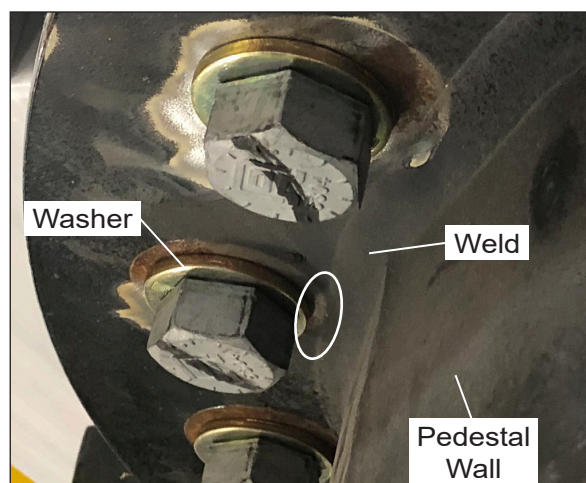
Outer Race Rotation Bearing Cap Screws and Washers
